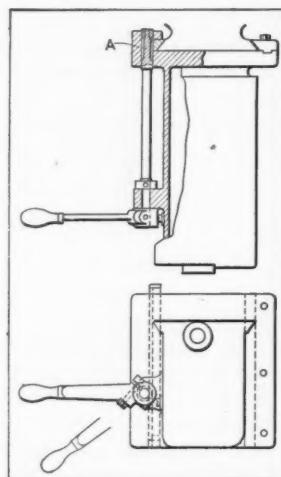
Long Strip for Clamping Knee of Milling Machine
